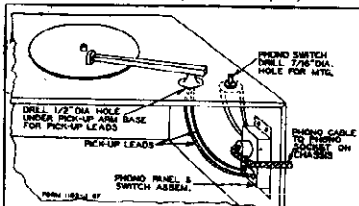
Phonograph Connections Using Phono Cable and Panel Assembly
